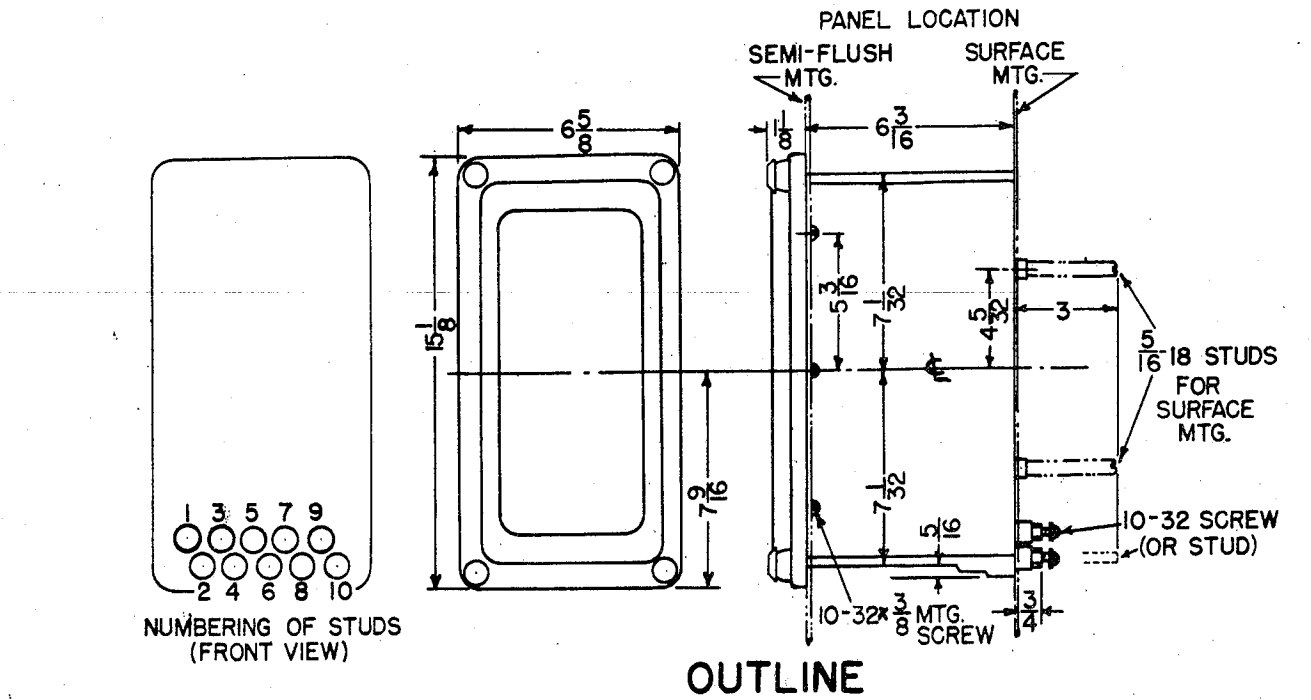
(K-6209273-2) Outline And Panel Drilling Dimensions For Type CFF Relays
